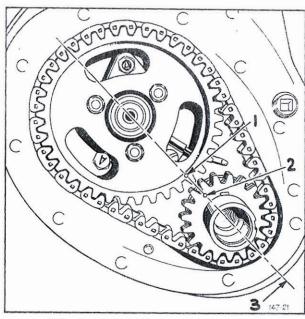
Marks on Timing Sprockets 1—Mark on camshaft sprocket 3—Center line 2—Mark on crankshaft sprocket
